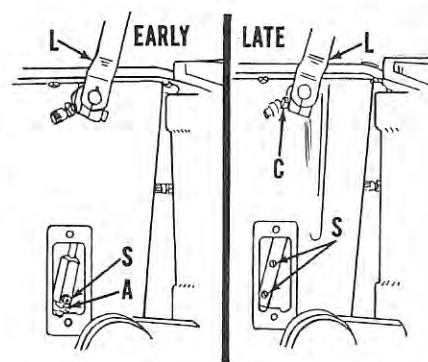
Upper motor leg with shift linkage access plate removed. Models before Serial Number 1,400,000 are shown on left.
